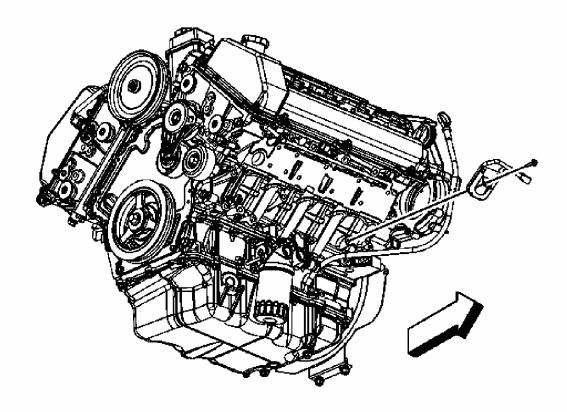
Locating Coolant Heater & Bolt Courtesy of GENERAL MOTORS CORP.
